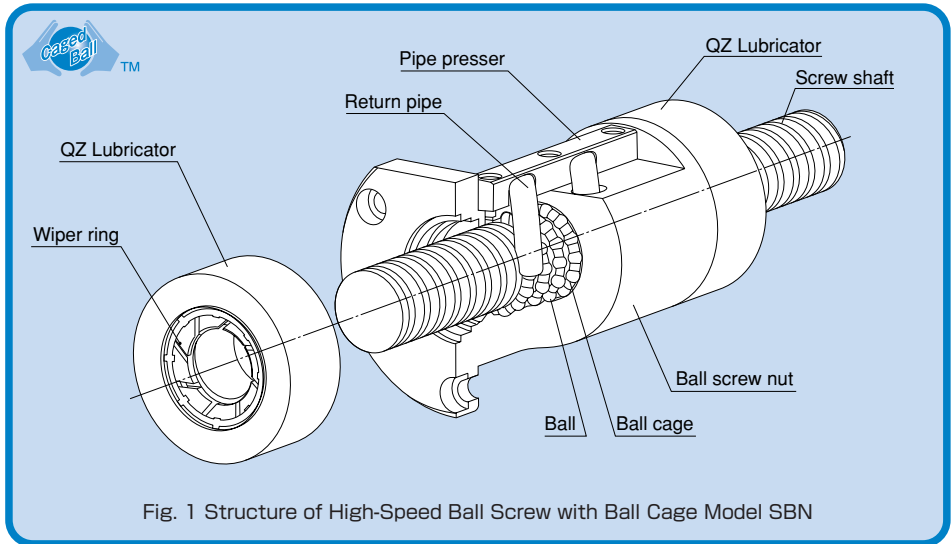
Structure of High-Speed Ball Screw with Ball Cage Model SBN
